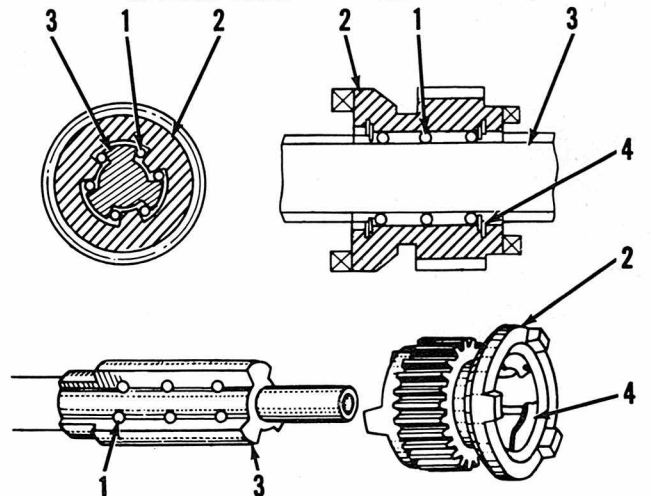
Arrangement of third gear on drive shaft. Steel balls are held in position by holding washer (4).
